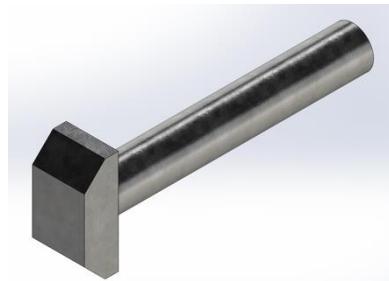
CAD Model of T Bolt that slides into the frames. Twist to lock in place.
